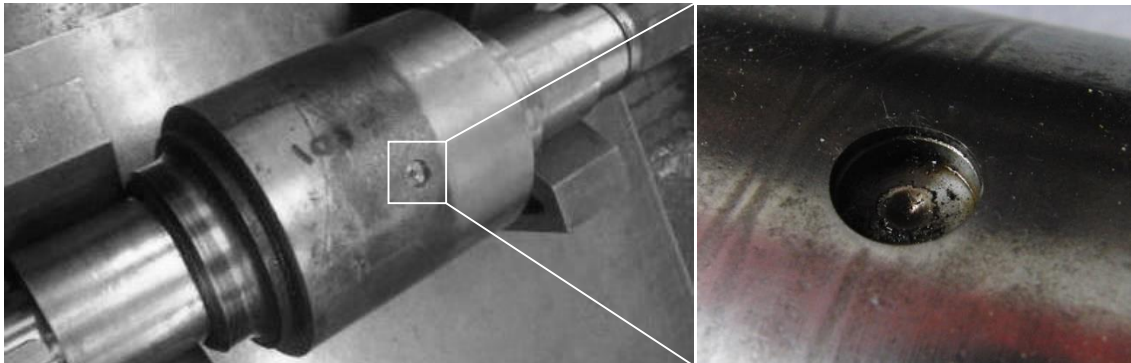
Attempted Drilling of Sheffield Mill Roll
